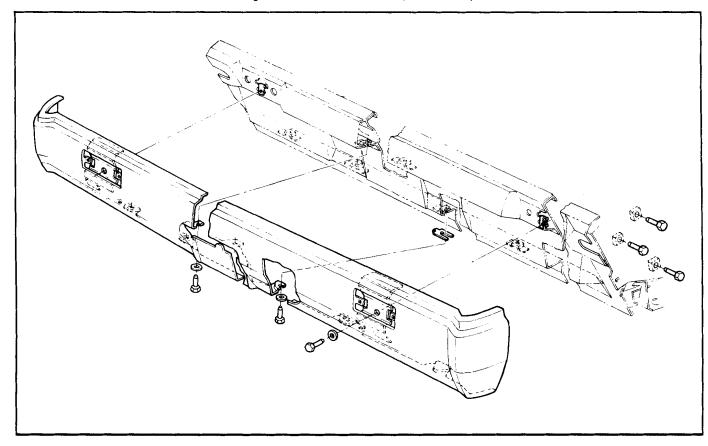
B Series Station Wagon Rear Bumper Assembly
